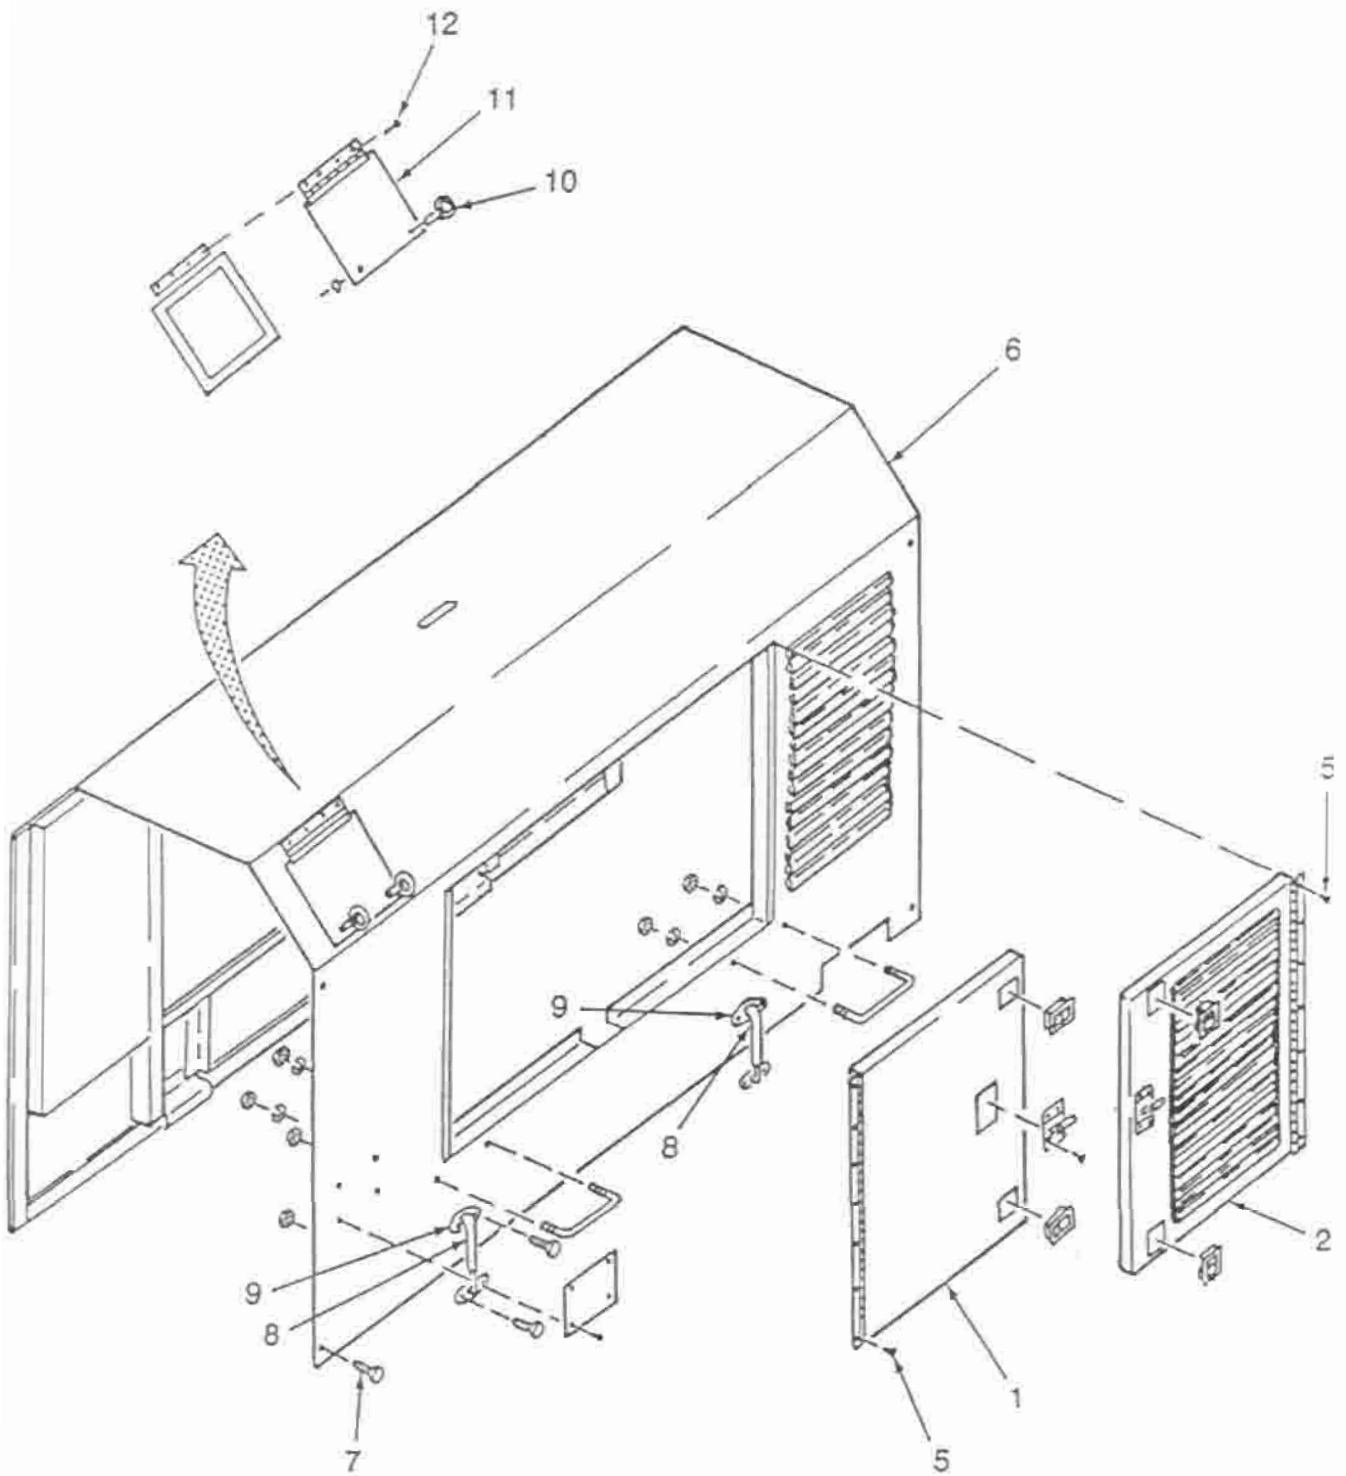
Roof Assembly (Sheet 1 of 2)
